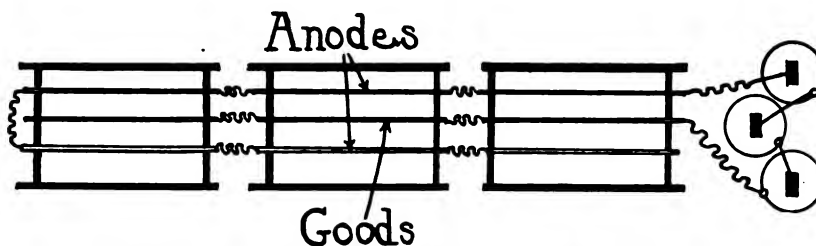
PLAN VIEW SHOWING TANK ARRANGEMENT AND BATTERY AND ROD WIRING
